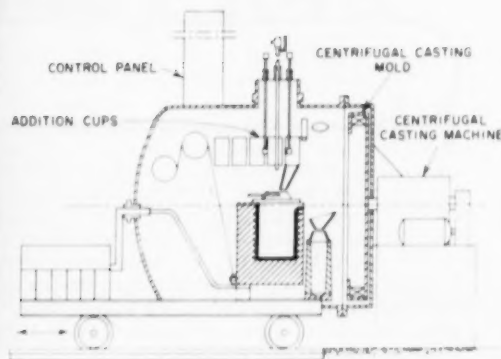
Cross section of a 1000-lb high-vacuum furnace, in closed position. The 9-ft-long melting chamber becomes sealed when the carriage, moving to the right, brings it against the cover which contains the casting mold. Great areas for additional productive research exist in the field of vacuum melting, joining, and heat-treating.
